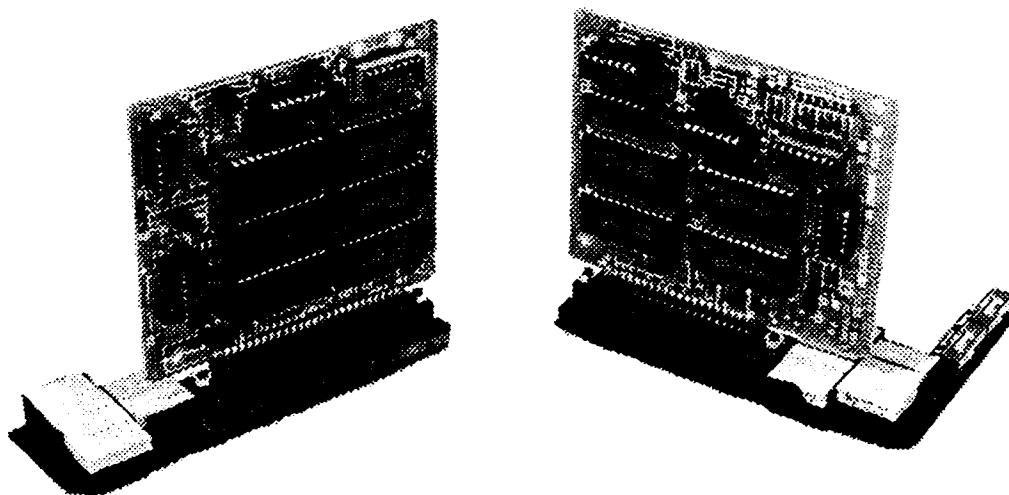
Photograph of final camera circuit boards utilizing printed circuit board techniques.
